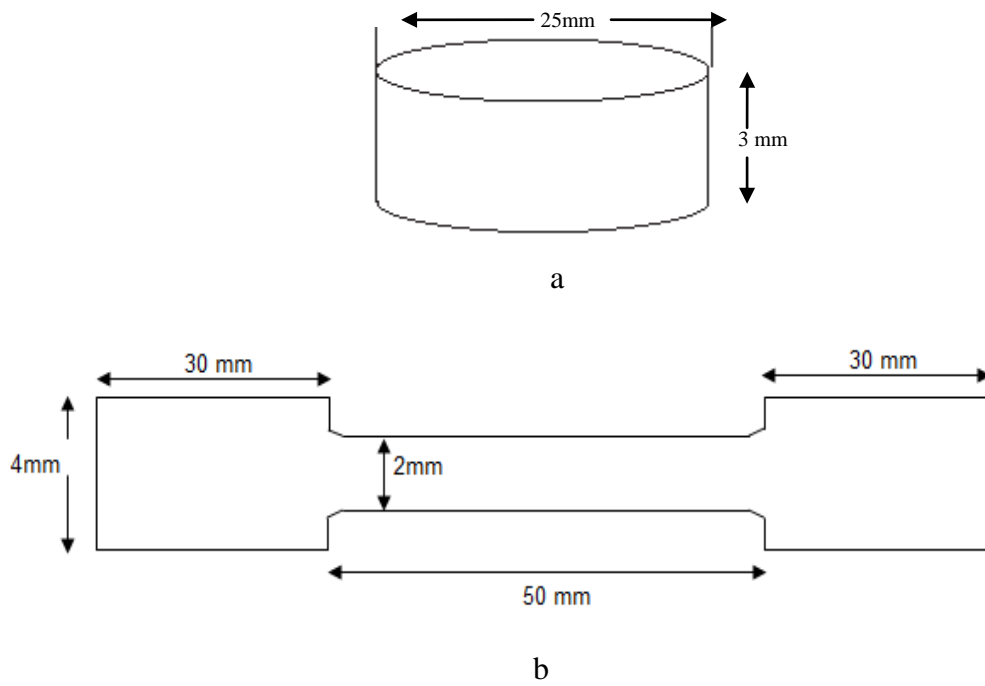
Dimension for standard test pieces a) Hardness Test b) Tensile Test
